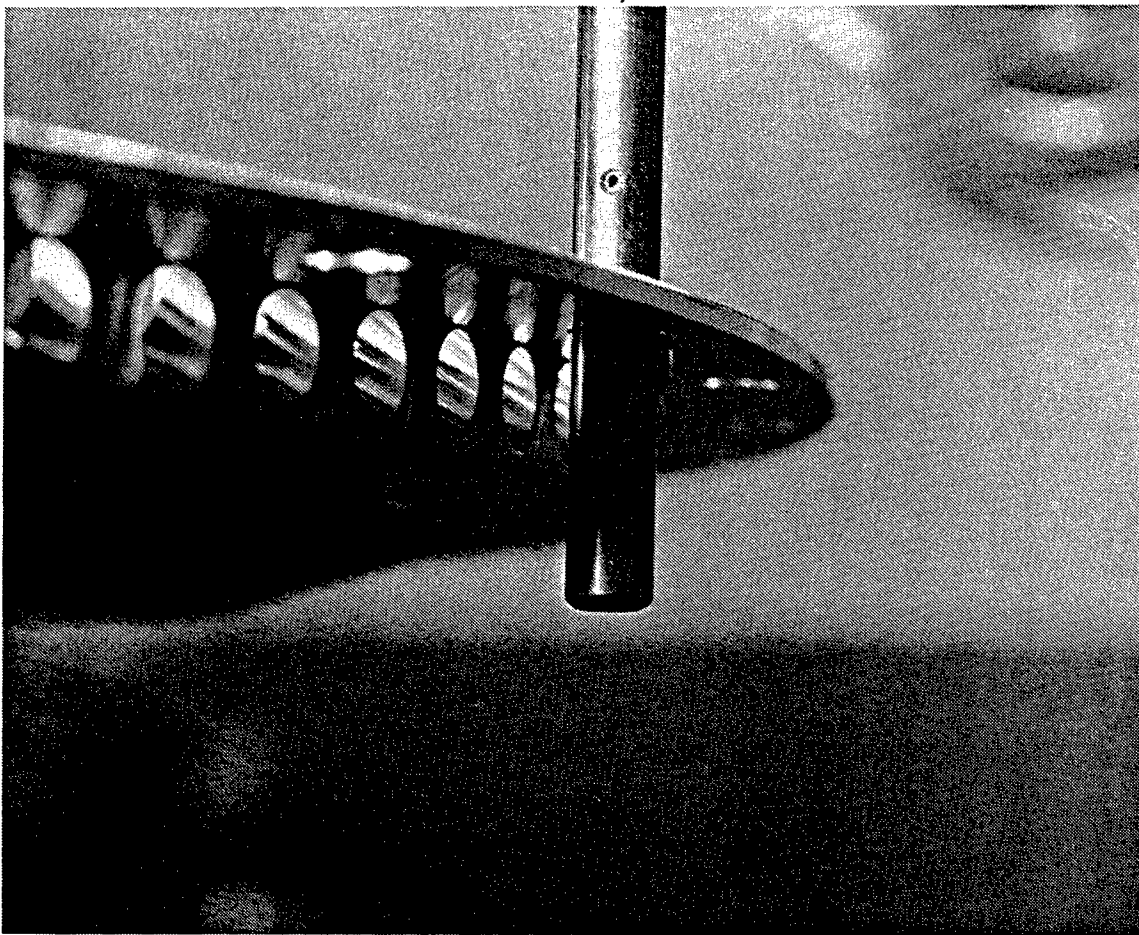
Hole deburring, Number 4 Bearing Housing
